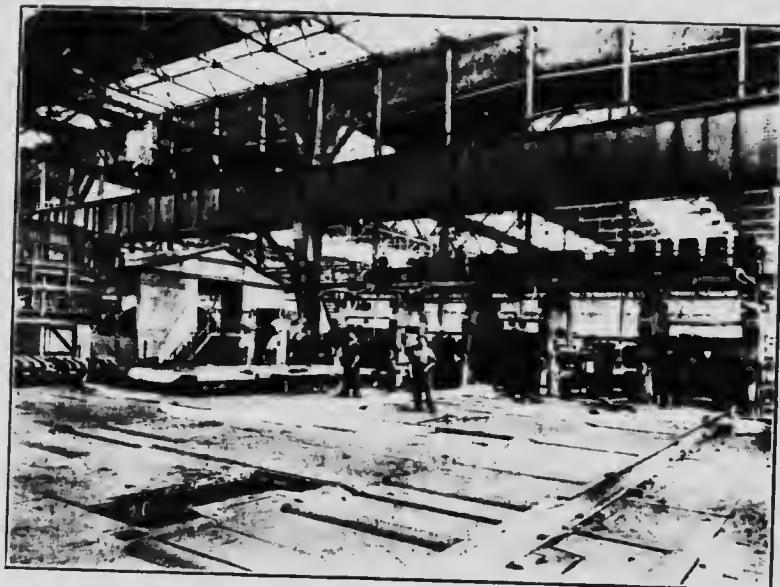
30-inch three high rolling mill with five stands of rolls driven on the lifger system. Motor, 11,600 horse-power, at 52 r.p.m. Maximum speed, 180 r.p.m. This mill is rolling beams and rails.
